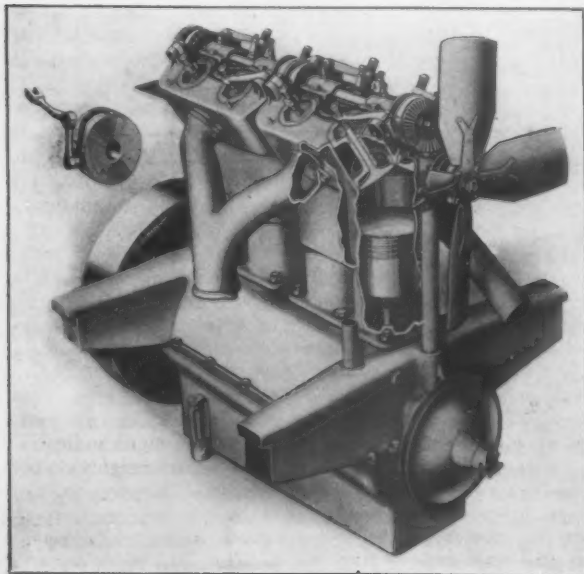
View of the Motor with the Casing Partly Broken Away to Show Details of Valve Mechanism.
